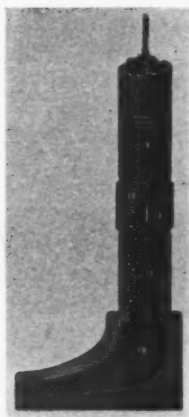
VIBRATOR ATTACHMENT FOR PATTERN BOARDS.
